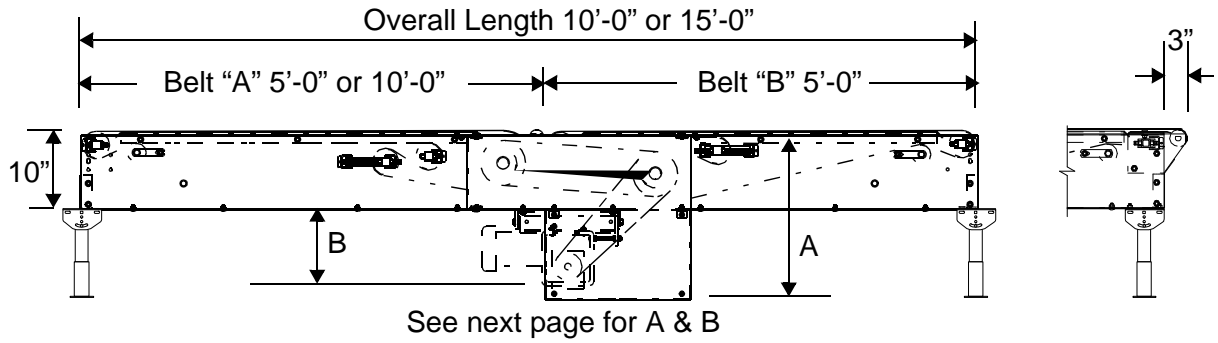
10' Brake/Meter Belt (Knife Edge Pulley Shown at Right)
